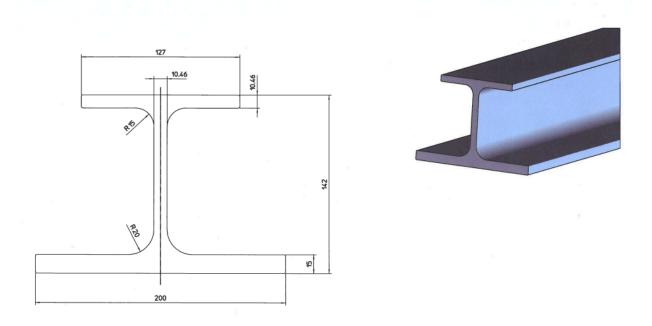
Cross section of I-beam (all values are in mm). The slope, length and tolerances of the track will be provided in a later addendum.
